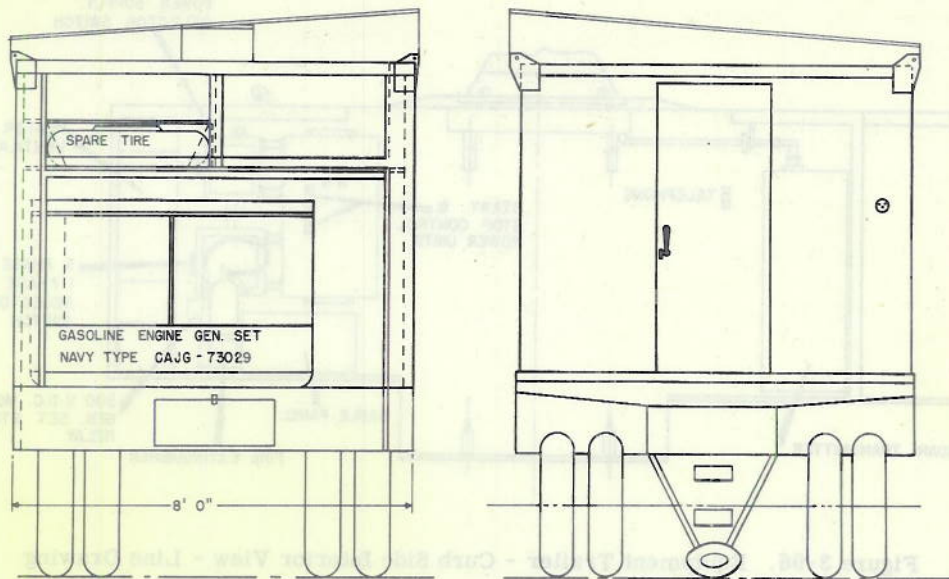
Equipment Trailer - Front and Rear Exterior Views - Line Drawing
